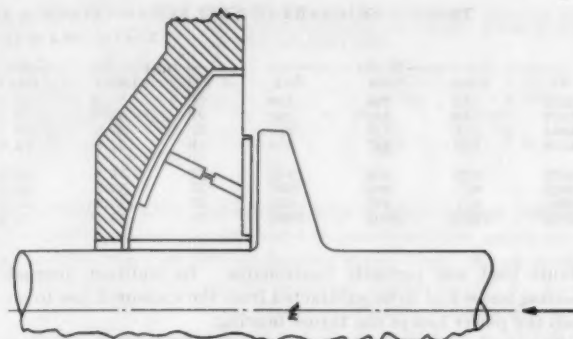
SKETCH OF HYDRODYNAMIC POCKET THRUST BEARING WITH INTEGRAL PRESSURIZED BALL SEAT
